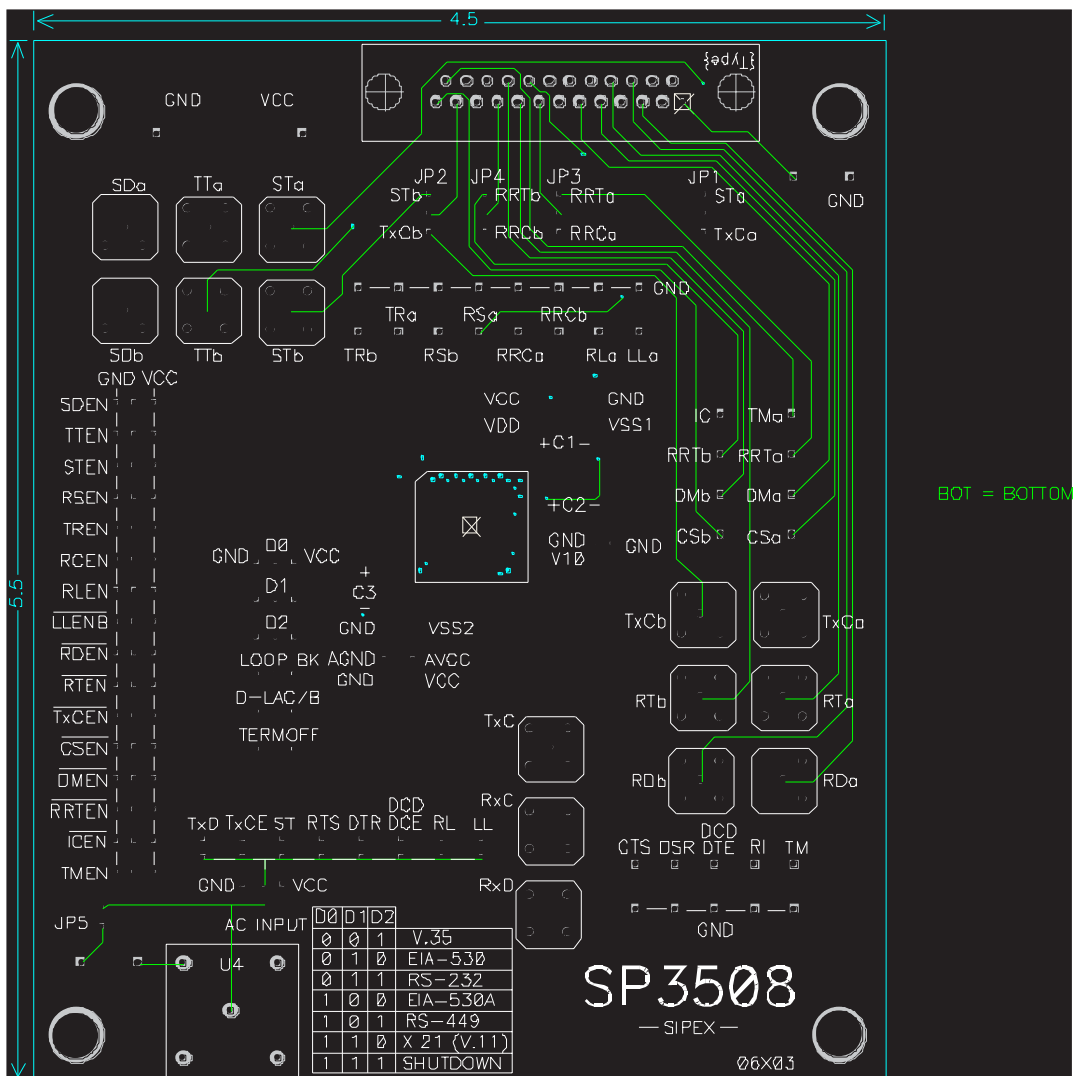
SP3508 Evaluation Board Layout Bottom Layer
